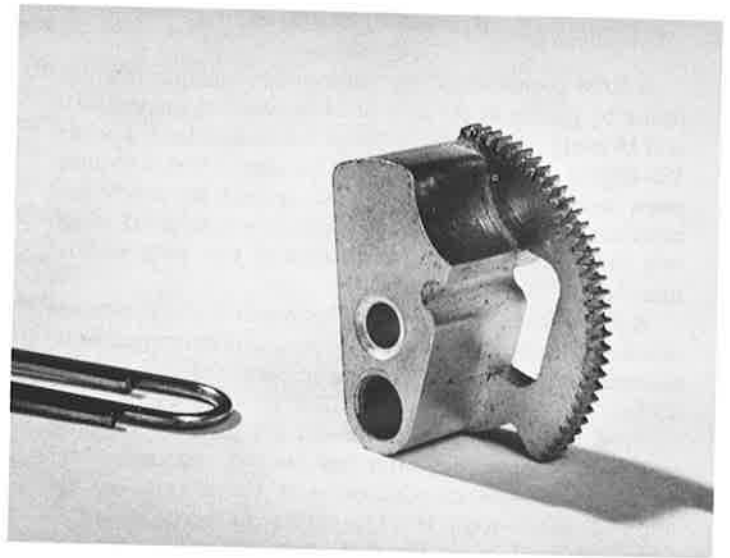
BRASS GEAR ROTOR FOR TIMING MECHANISM IN MECHANICAL FUZE.
